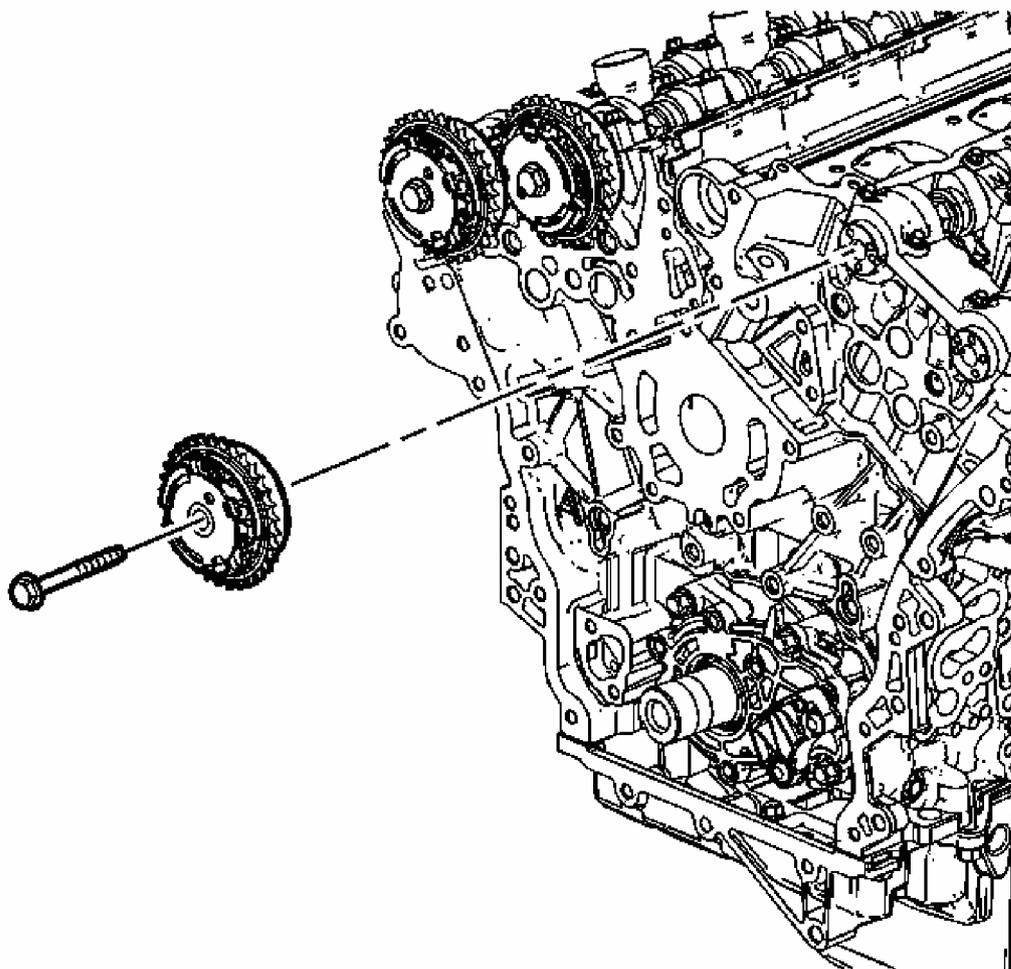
View Of Camshaft Position (CMP) Actuator - Bank 2 Exhaust
